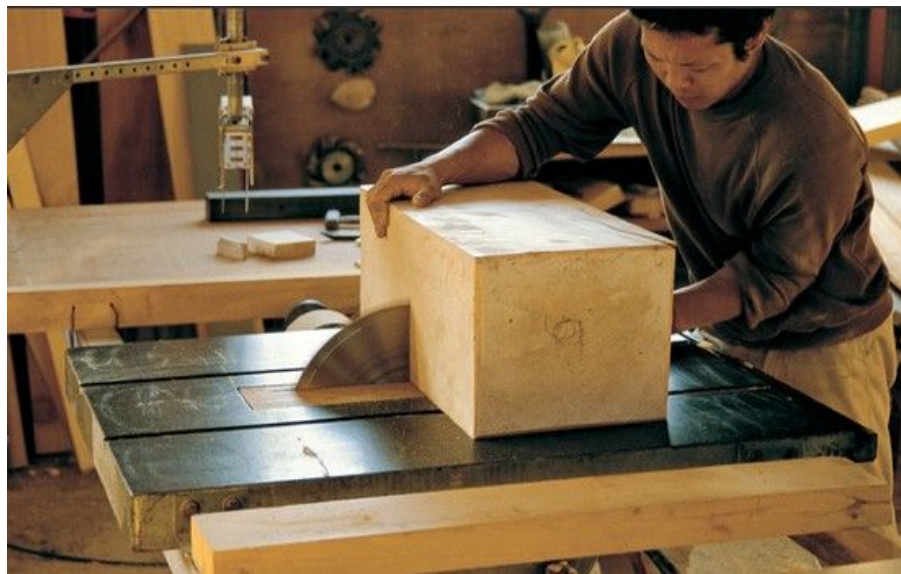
The carpenters do use machinery on occasion, particularly for milling wood to rough dimensions.
